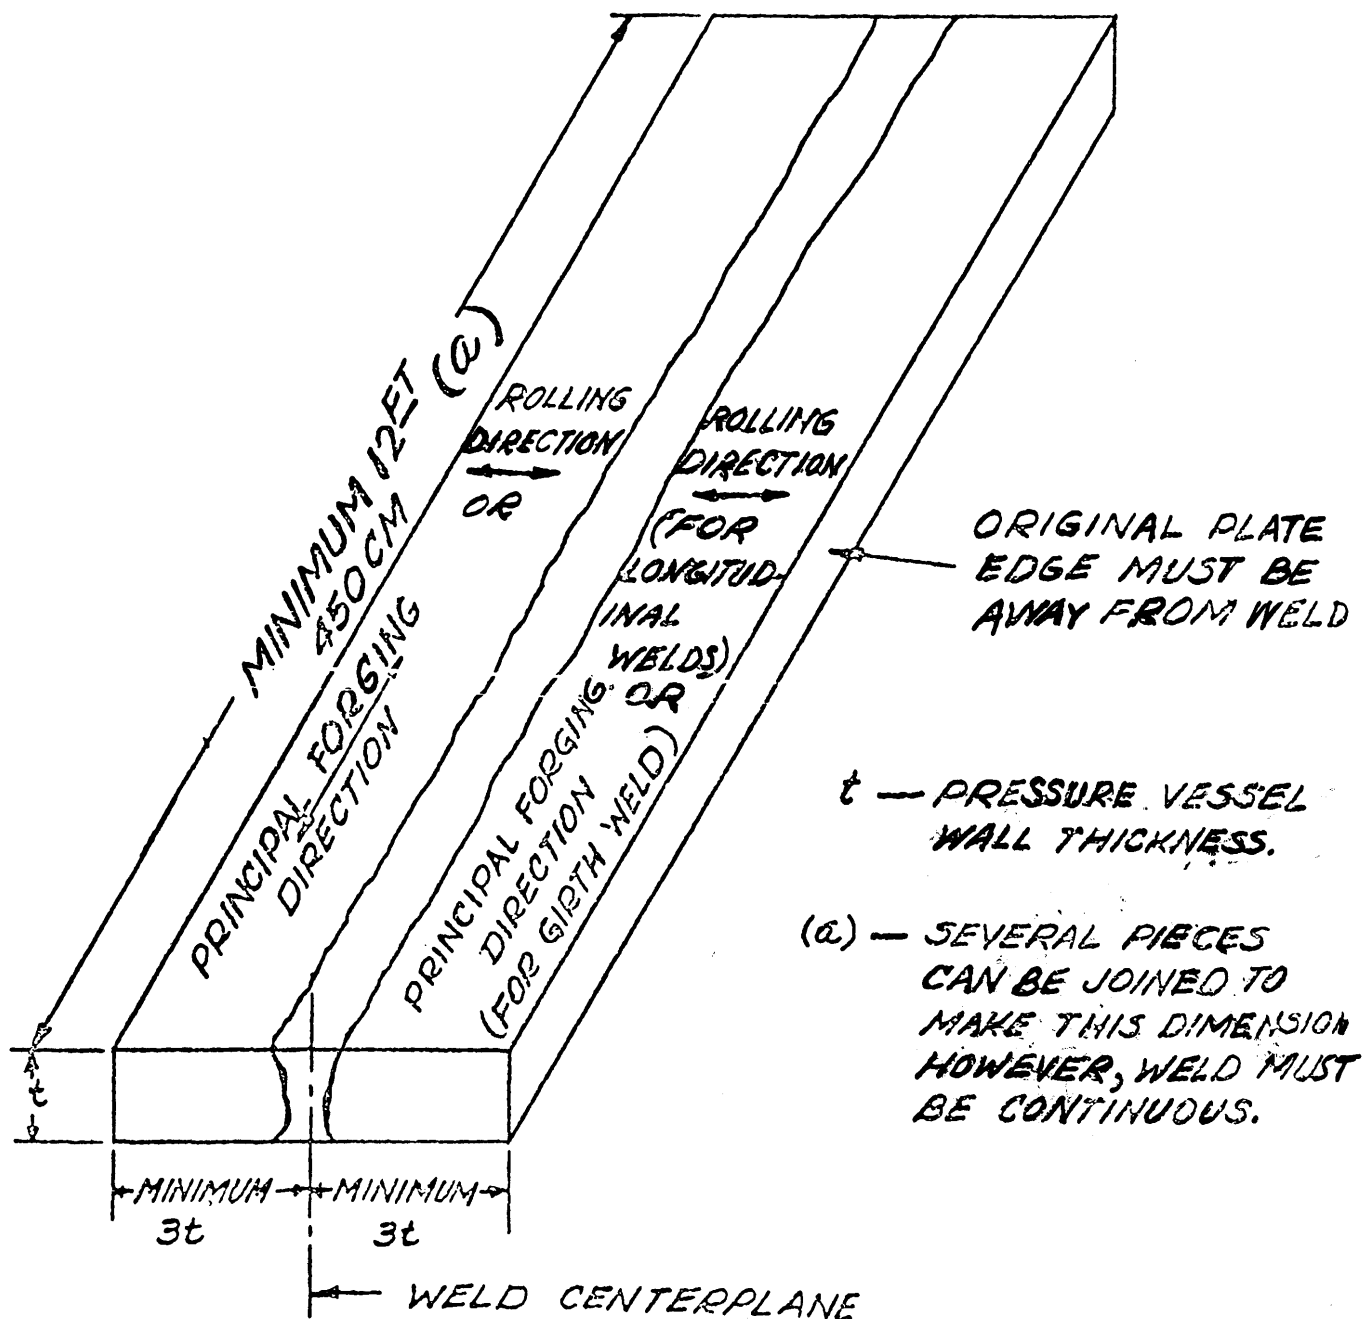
, TEST WELD FOR WELD & HEAT AFFECTED ZONE SPECIMEN
